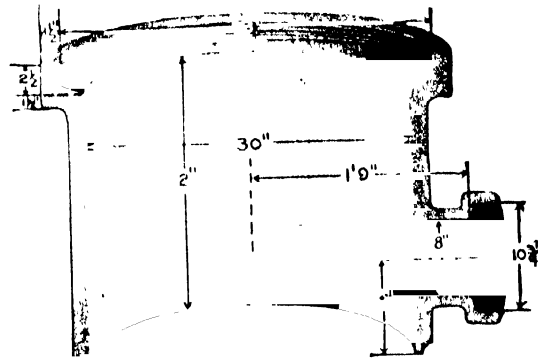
, ACID PROOF TOWER TOP OR BOTTOM SECTION
